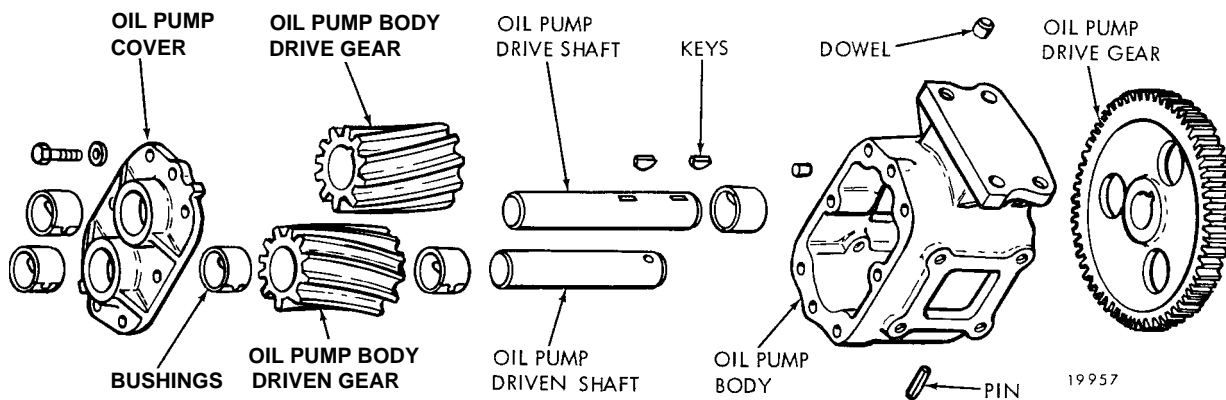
Oil Pump Details and Relative Location of Parts (8V Engines)
